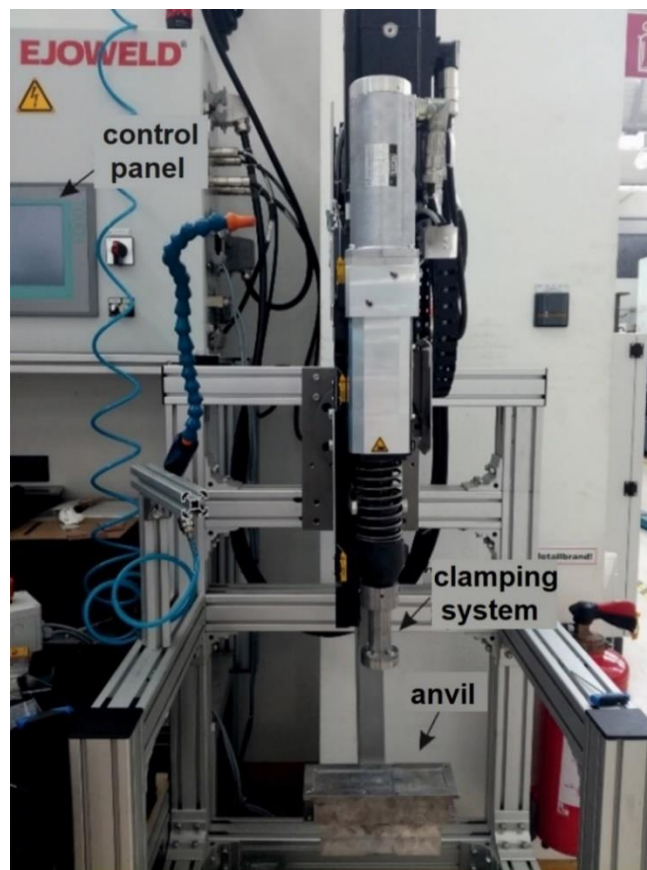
Adapted force controlled EJOWELD C50R FSSW machine
